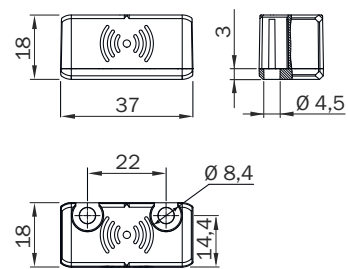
Dimensional drawing of "Compact" STR1 actuator
